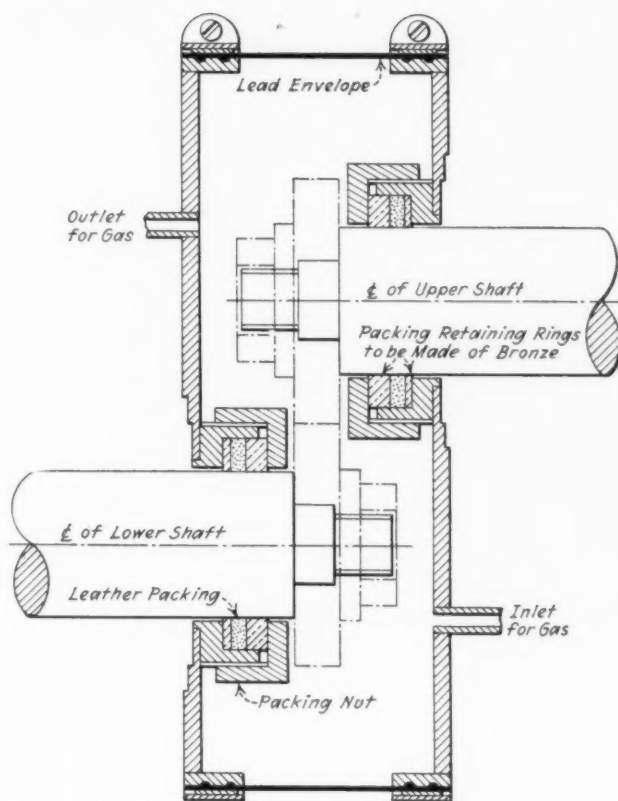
AMSLER WEAR-TEST MACHINE USED BY DR. FINK IN HIS TESTS ON WEAR OXIDATION
